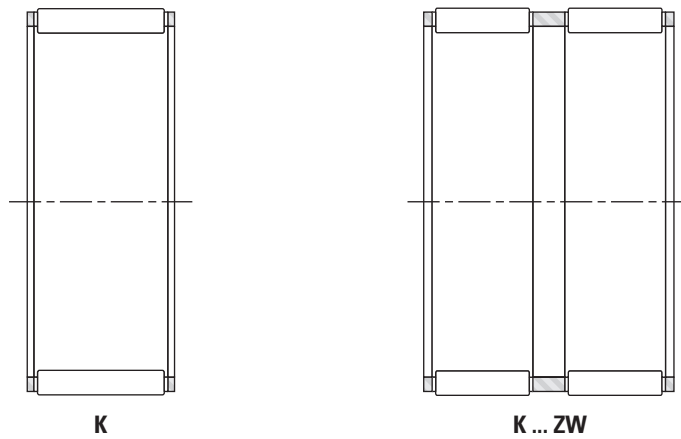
Types of Metric Series Radial Needle Roller and Cage Assemblies
